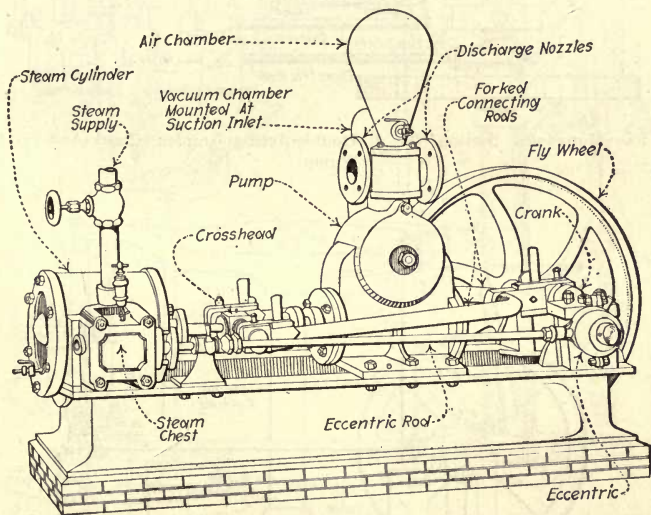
Steam-Driven Crank-And-Fly-Wheel Pump.
